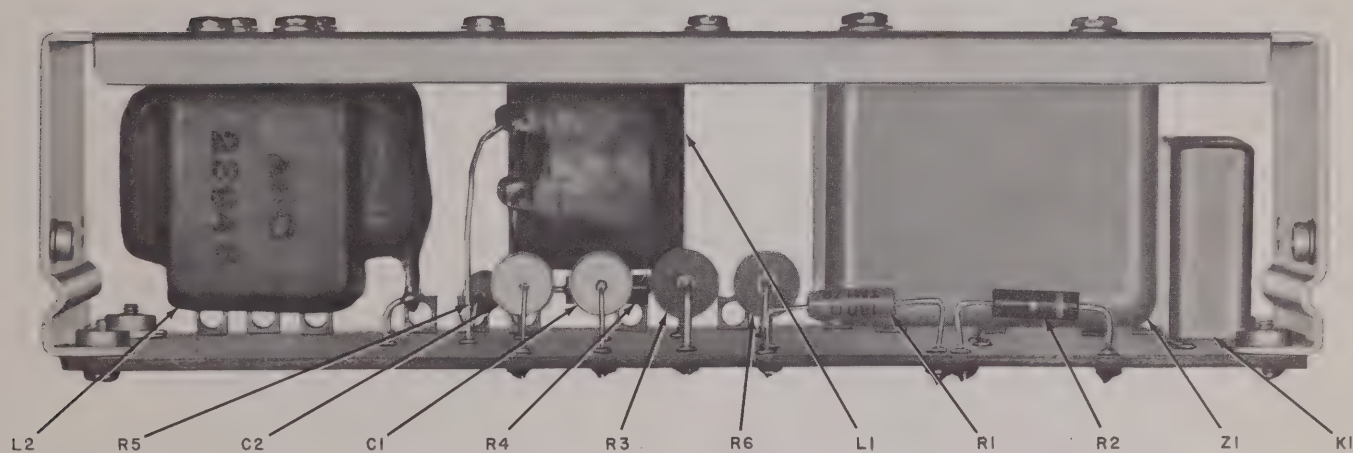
Filter Assembly A1 or A3 with Filter Kit ARC-24347, Left Side View
